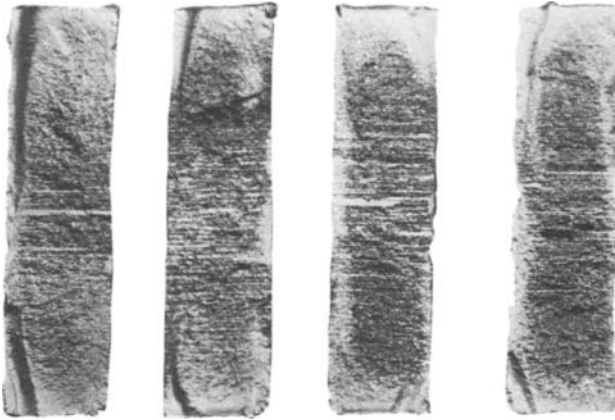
Fractograph of fractured hardened macroetched discs of AISI W1 (1.3% carbon) tool steel that were excessively graphitized as the result of a high, undesired aluminum content.
